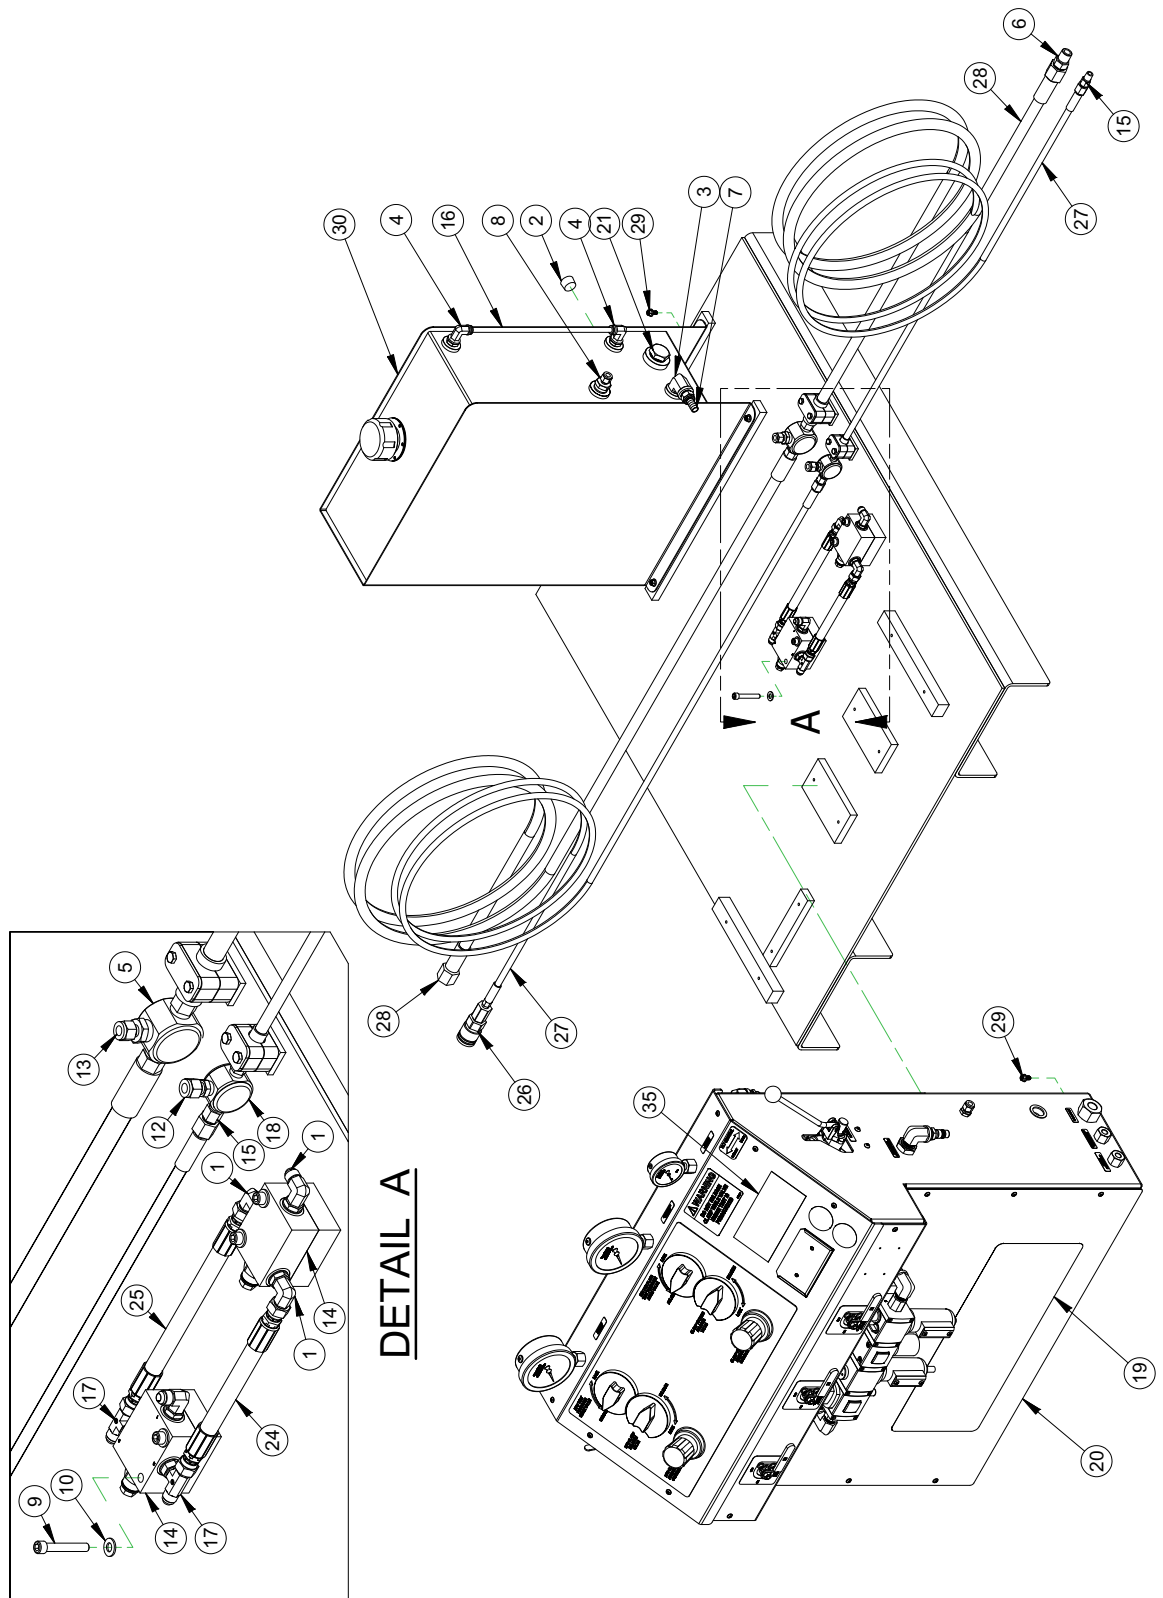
UFV-24-300T CONSOLE ASSEMBLY (P/N 91681)
